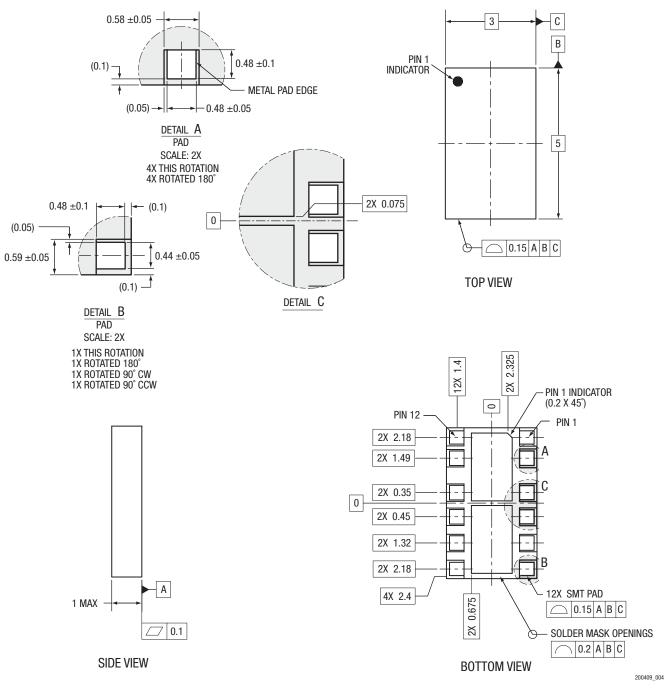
SKY77176 Package Dimensional Drawing (All Views)
